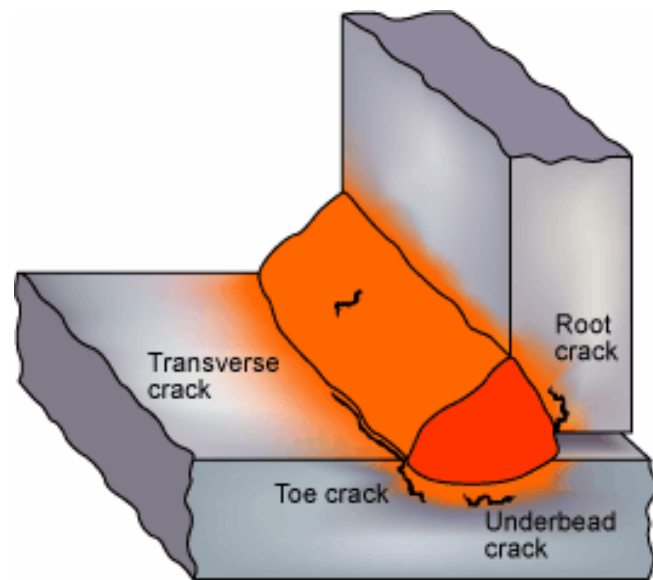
Schematic Orientation Of Hydrogen Cracks In Fillet Weld. Not All Types Occur In The Same Weld. (Courtesy TWI, UK).
